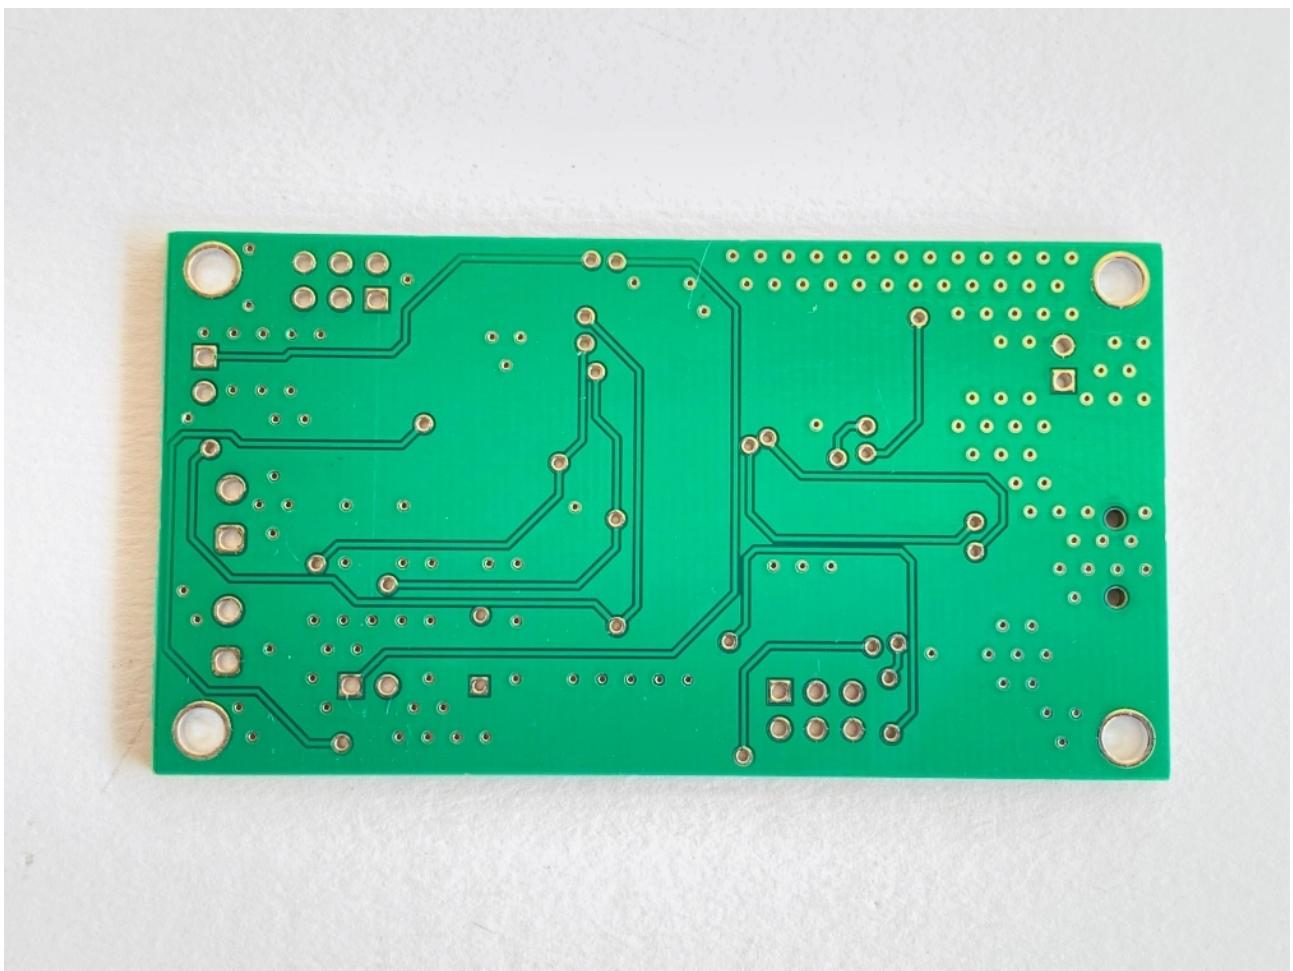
Unsoldered Main Controller PCB - Bottom
